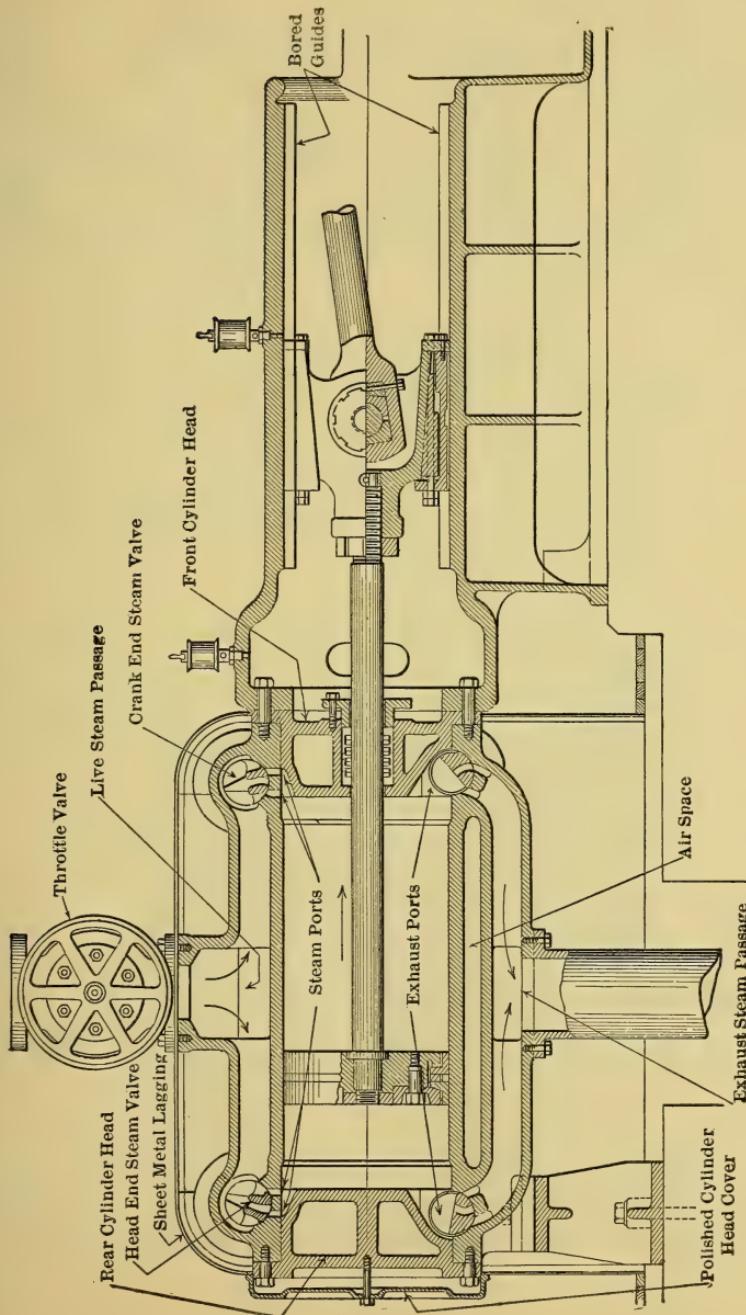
Section of Corliss Cylinder and Guides, and Half-section of Crosshead.
